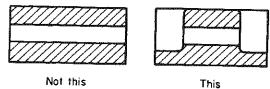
The improved design on the right provides better rigidity of the mold core pin.
